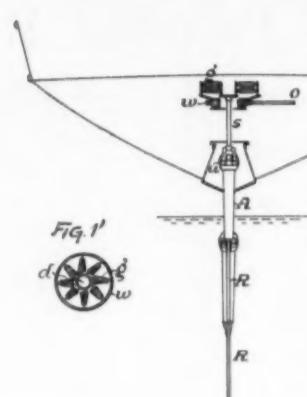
Rear View, Showing the Stern and the Pendulum Propellers.
